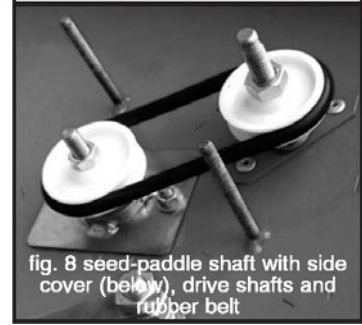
seed-paddle shaft with side cover (below), drive shafts and rubber belt
